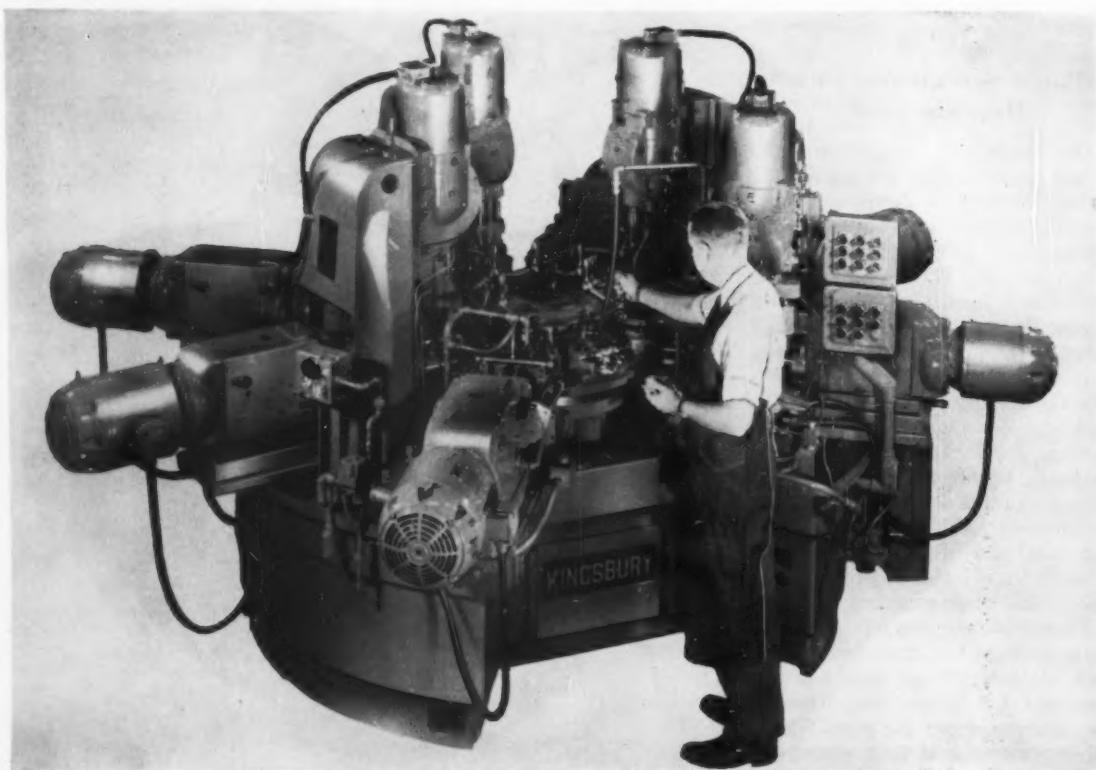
Multiple-unit automatic machine built by Kingsbury Machine Tool Corporation
